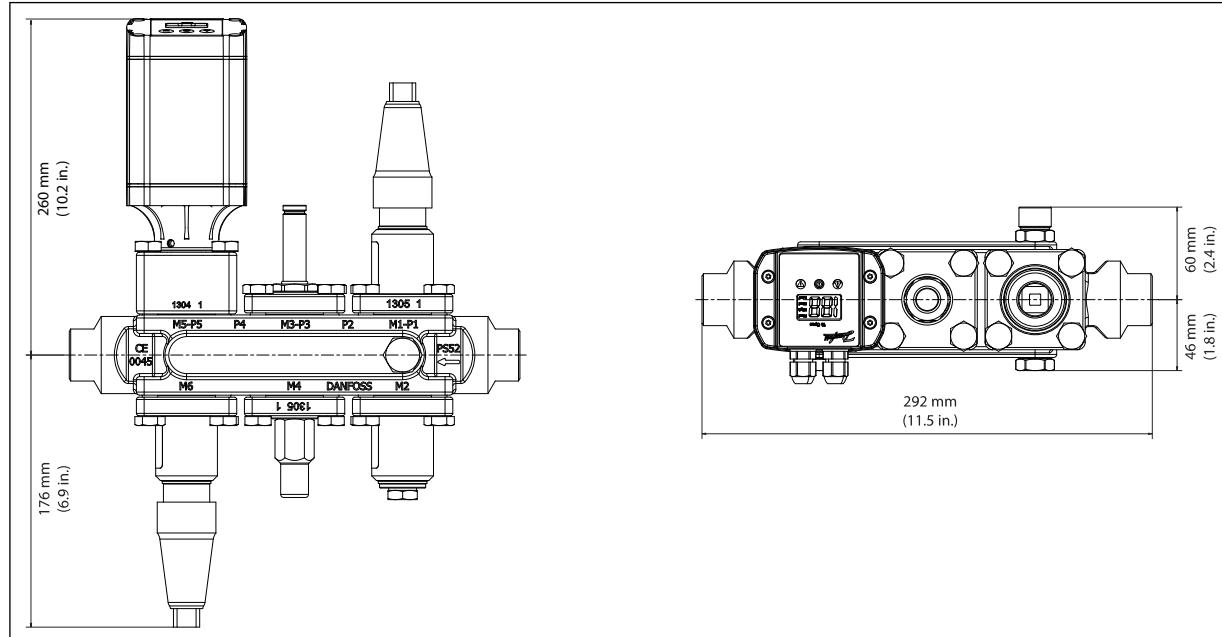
A: Butt-weld ANSI (B 36.19)
